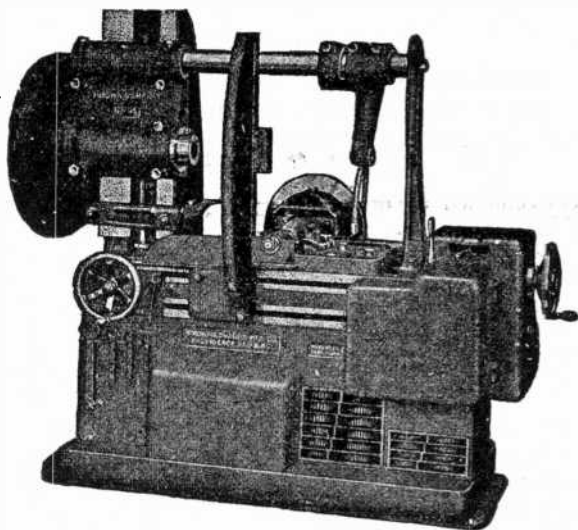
Brown & Sharpe automatic spur gear cutting machine. The cutter spindle is supported in heavy bearings and is provided with a balance wheel, keyed to the tapered end of spindle, to steady the cutting action. The spindle has keys for driving cutters with either new or old size keyways. It is driven from a worm sliding in a splined horizontal driving shaft, through a bronze driving gear, which is fitted to integral keys on the spindle itself. Positive clutches and integral keys are used to eliminate the possibility of backlash in the spindle driving mechanism. The spindle can be removed and smaller sizes substituted and the spindle outer bearing may be adjusted for wear. The work spindle slide has a tapered gib on the inside of the way which provides an added guide when the slide is loosened for adjustment. The slide has a positive bearing on both sides of the flat and dove-tail ways to take end pressure. A central oiling station located on the cutter slide assures positive lubrication of the spindle bearings and the cutter slide ways. The indexing mechanism is also lubricated from a central station within the case itself. The cooling piping is arranged to avoid sharp bends and air pockets.
